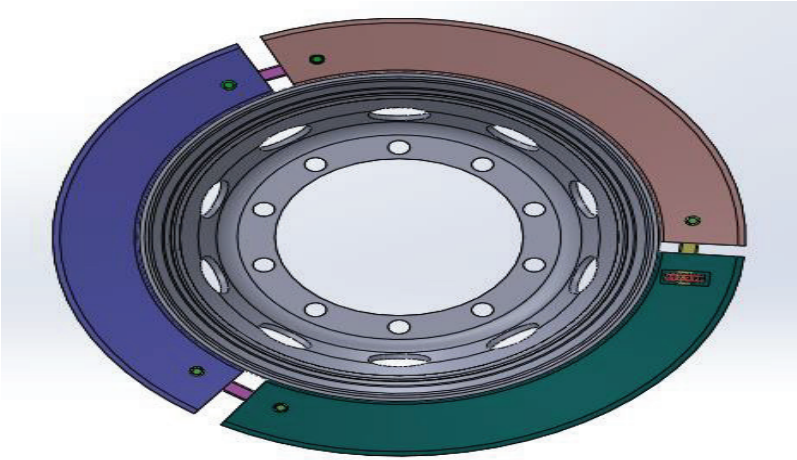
Mounting of 3 Piece Run Flat on the Rim
